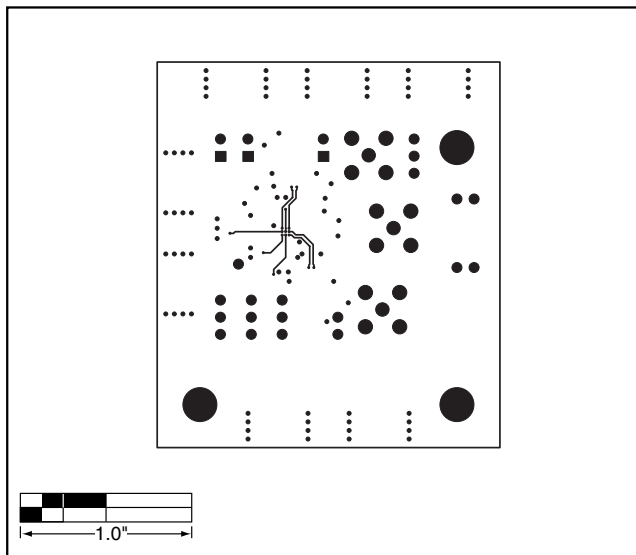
MAX2385/MAX2386 EV Kit PC Board Layout
